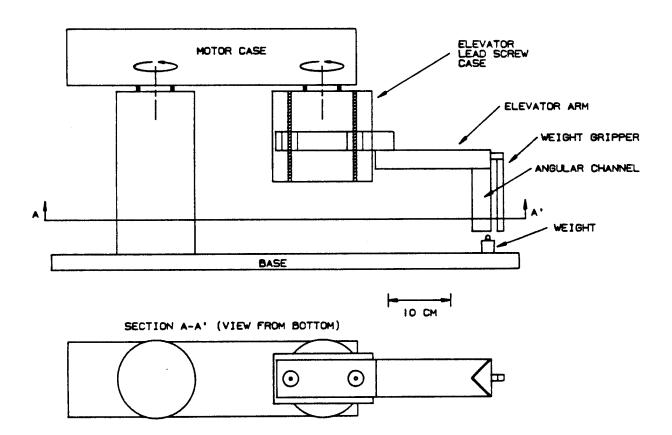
Three stepper motors are located inside the motor case. They cause the motor case to rotate, the elevator lead screw case to rotate, and the elevator arm to move up and down. A fourth stepper motor, which is a low-power linear actuator, is contained in the elevator arm. It causes the weight gripper to move towards the vertex of the angular channel at the end of the elevator arm, to grip or release the weight.
